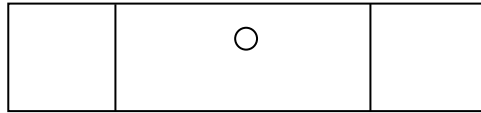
Cold Expanded Specimen Manufacturing Process Diagram
